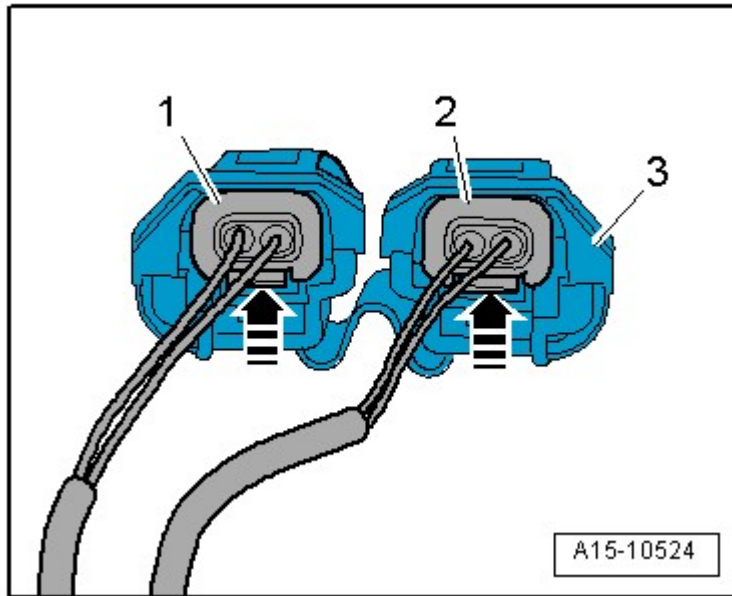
Identifying Connecting Bracket -3- On Camshaft Adjustment Valve Connectors -1- And -2-
